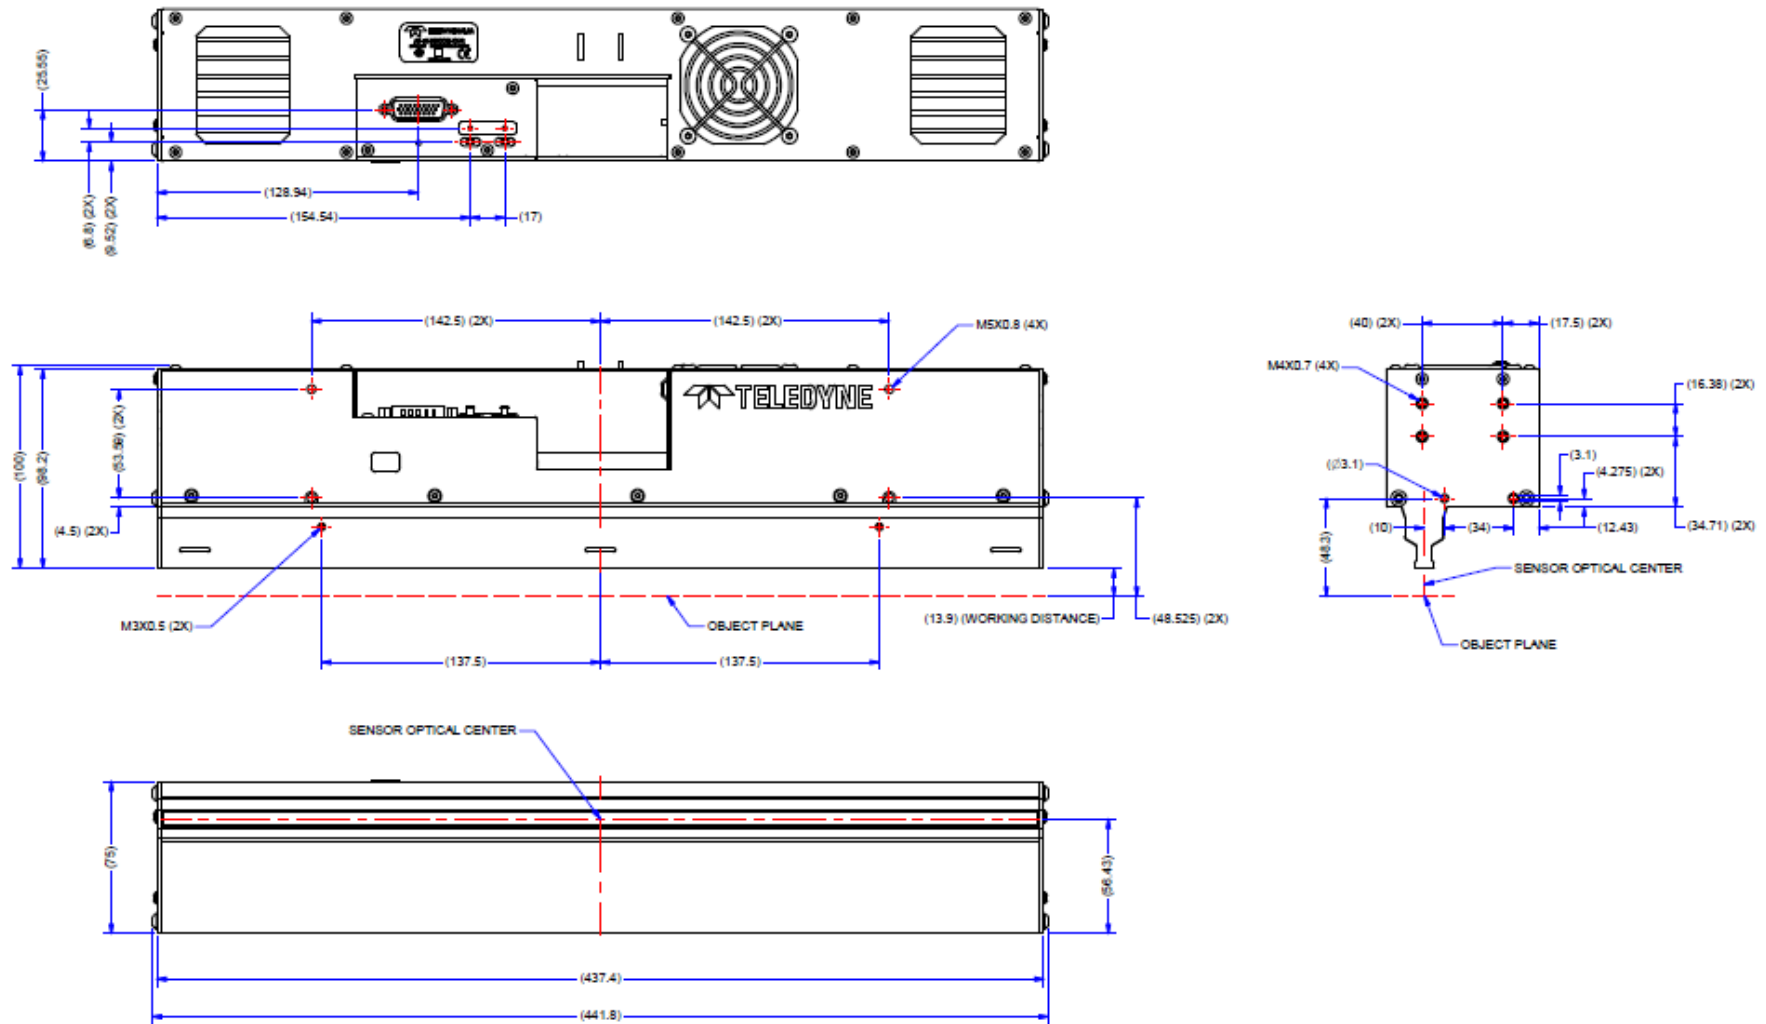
AX-FM-04B12A-00 & AX-FC-04B06T-00 400MM Mechanical Drawing (without optional LEDs)
